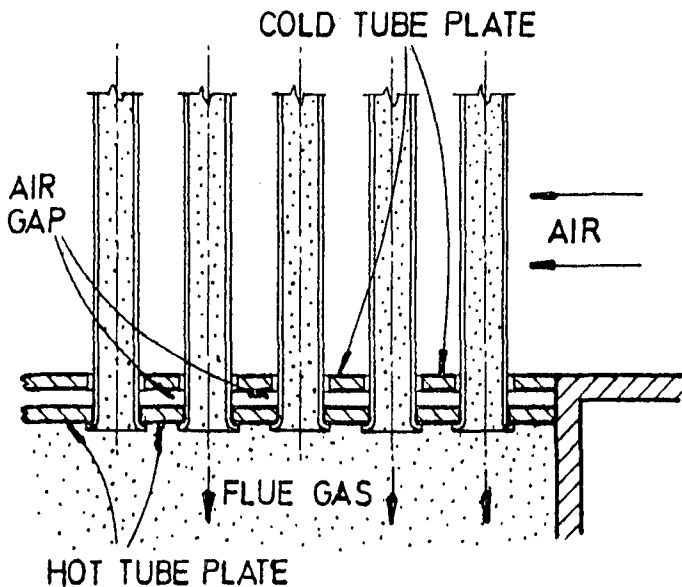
"Double Skin" Tube Plates of Cold Airheater
